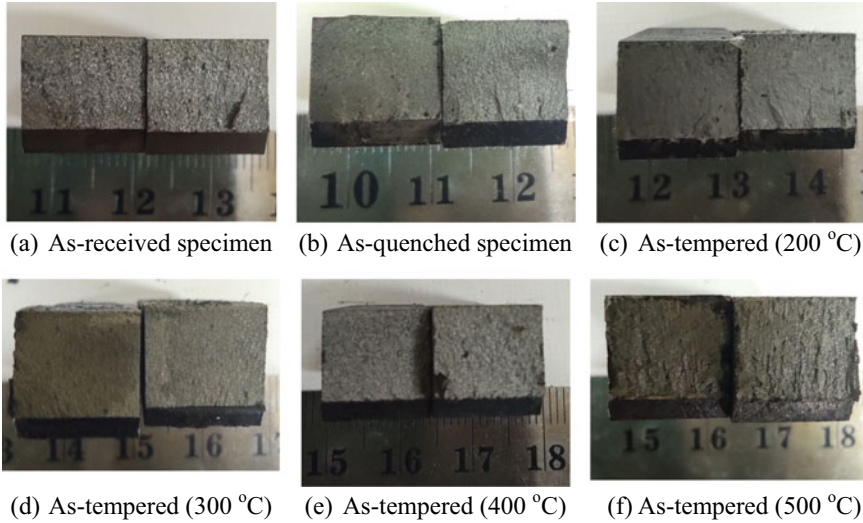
Fracture surfaces of broken Charpy V-notch impact specimens
